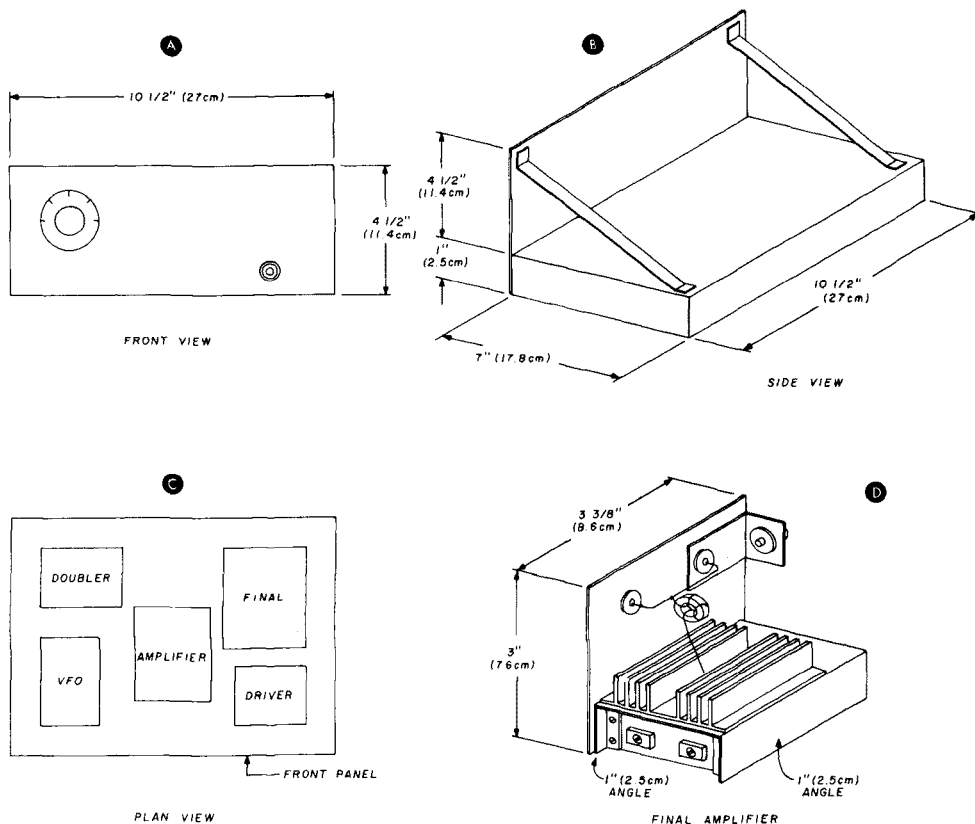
Dimensions and layout of the QRP transmitter. Sketches A through C show details of the main chassis; D shows the final amplifier arrangement.
